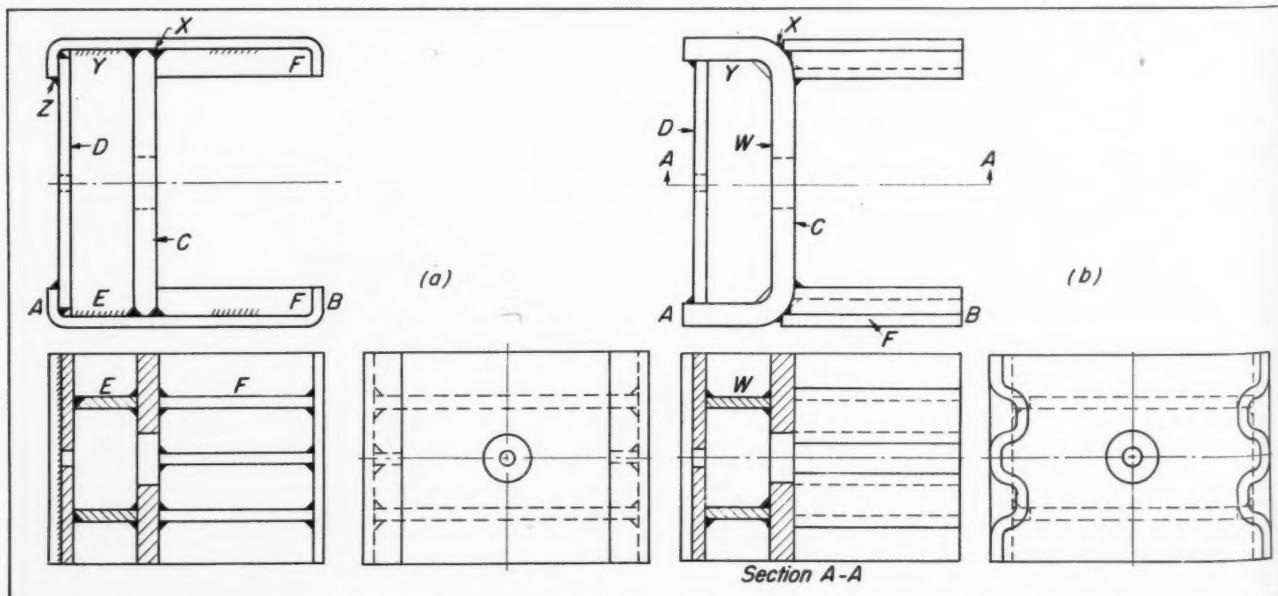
Below—Weldment design as originally received for quotation (a) and redesigned weldment, shown at (b), which requires one-half the number of parts and welding
